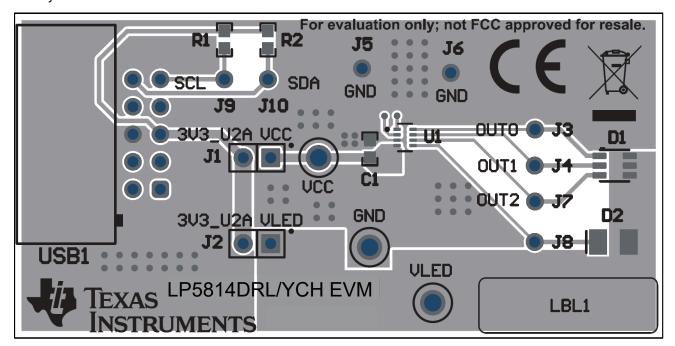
LP5814DRLEVM and LP5814YCHEVM PCB Top Layer
